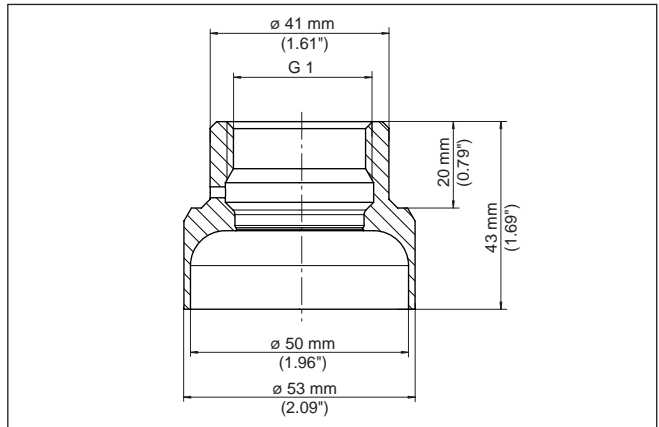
Dimensions direct welded socket for pipe mounting G1 - O-ring sealing
